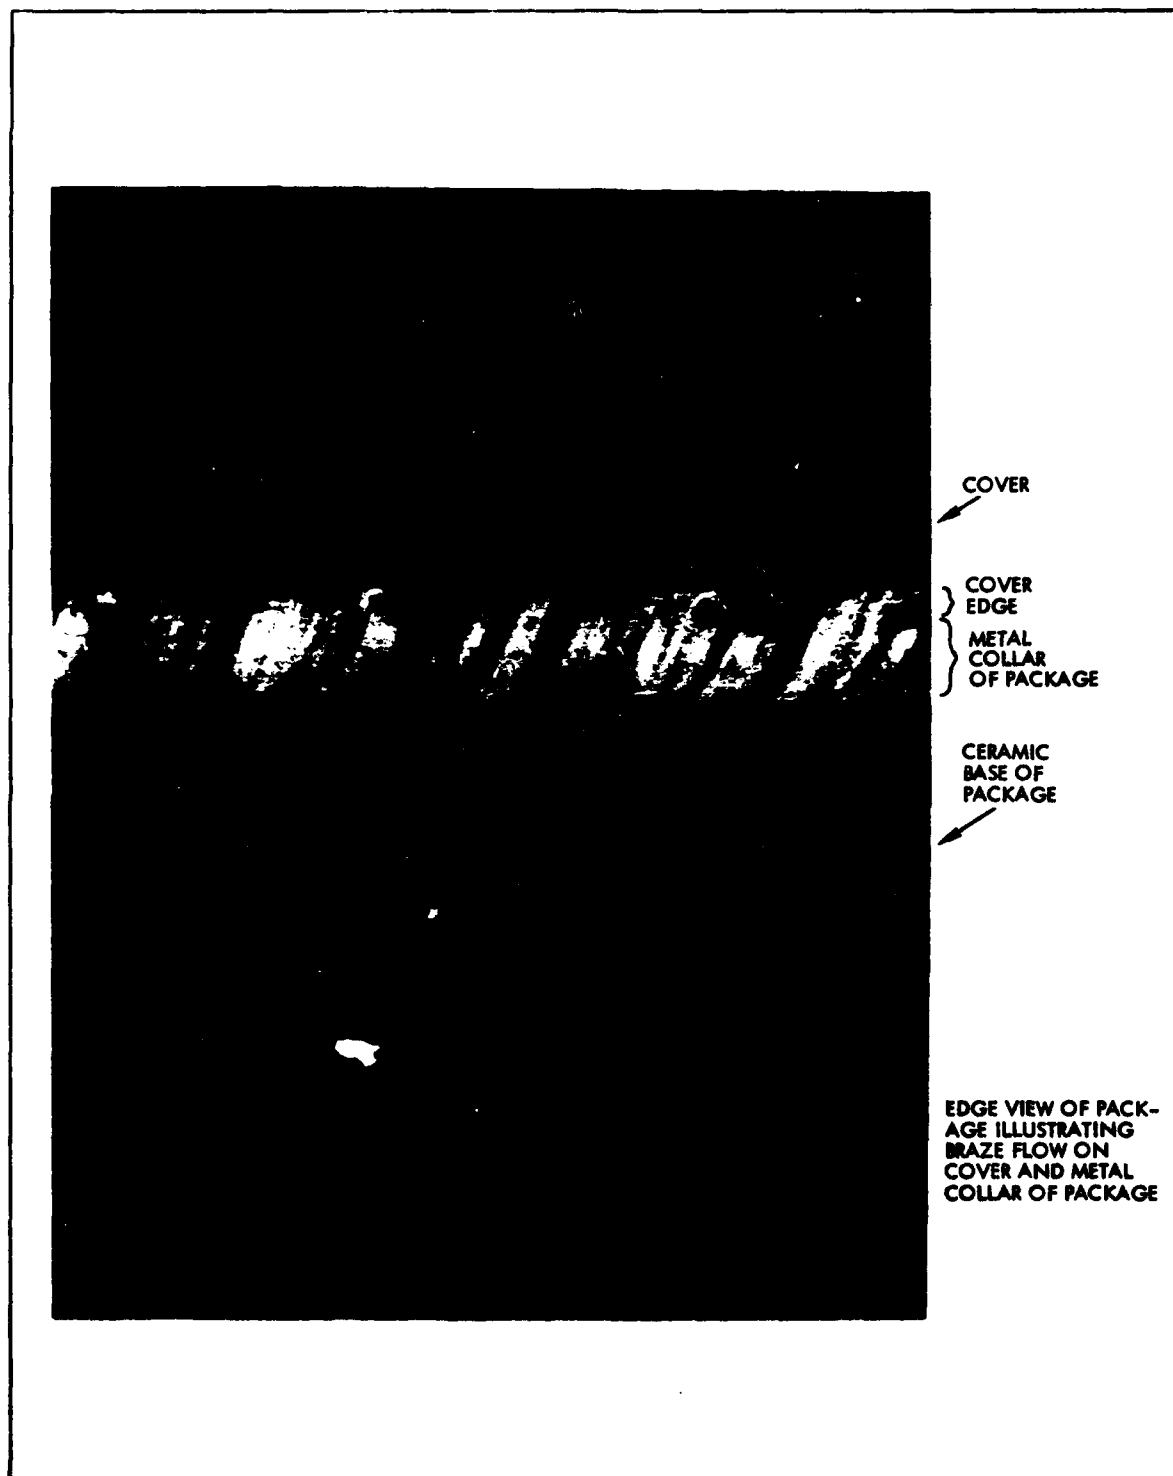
Parallel-Seam Braze Weld (50X)
